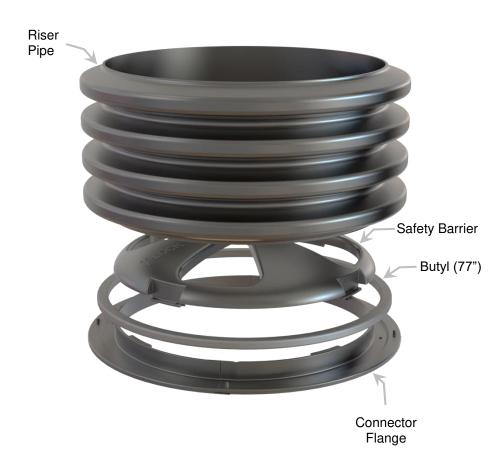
illustrates typical construction of pipe sections 22" – 37" tall.
